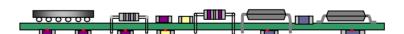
Wave-Soldered Double Sided Mixed Illustration
